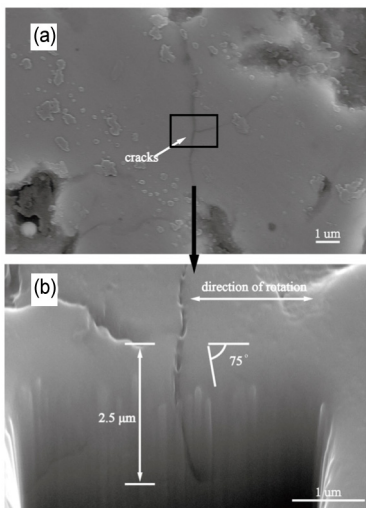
Skid damaged inner ring: (a) micro-cracks penetrating the pits; (b) a longitudinal crack.
